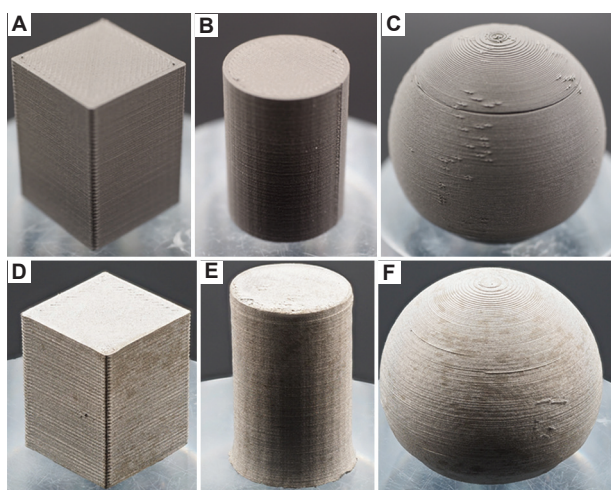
FDM-printed 316L parts. (A-C) Green parts directly after printing; (D-F) 316L stainless steel sintered metal parts
